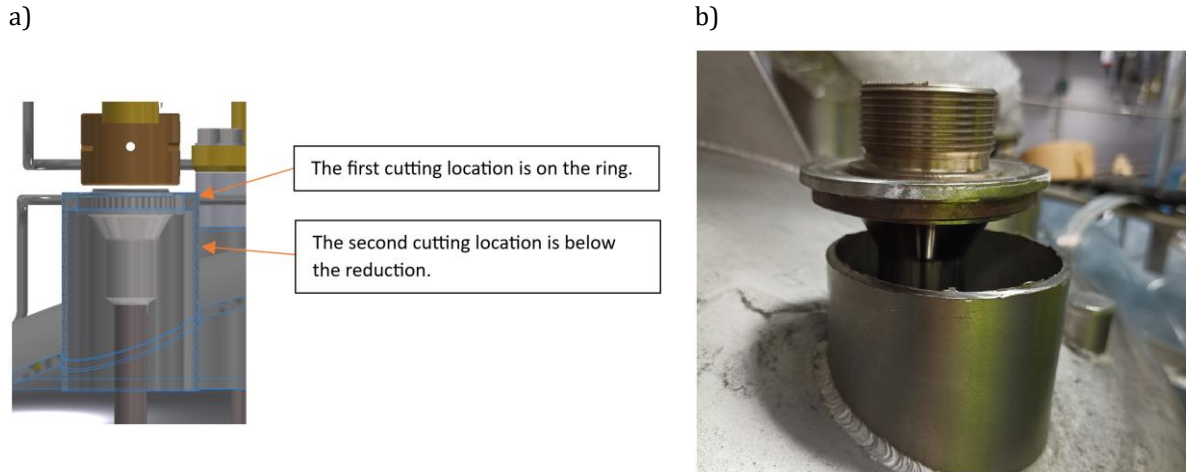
a) the cutting locations of the valve's vacuum jacket, b) view of the relaxed valve after cut-off from vacuum jacket.
